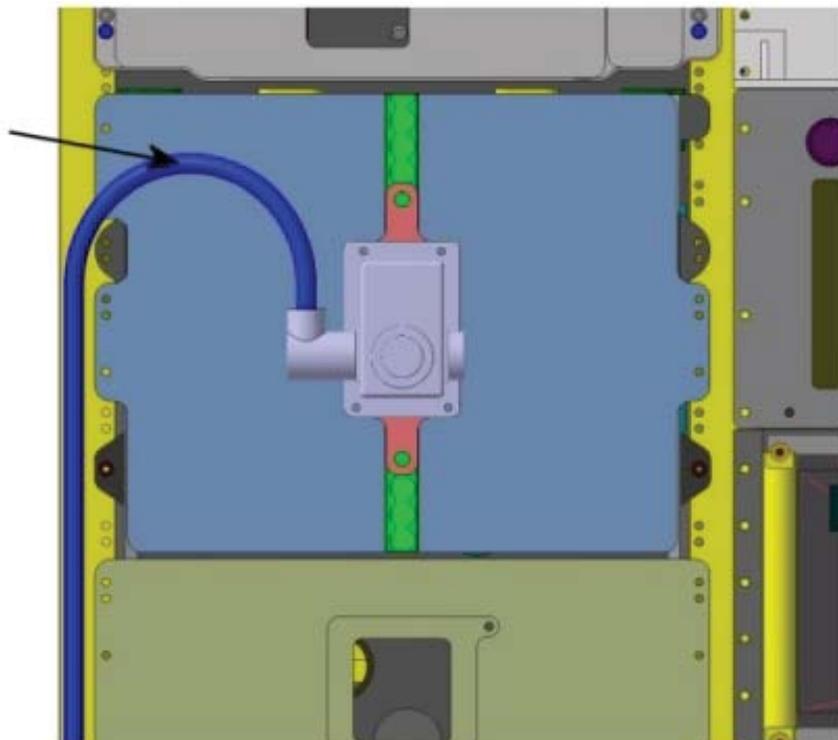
Detail of SAMS Cable Assy connection to SAMS SE mounted on FSL ODM
